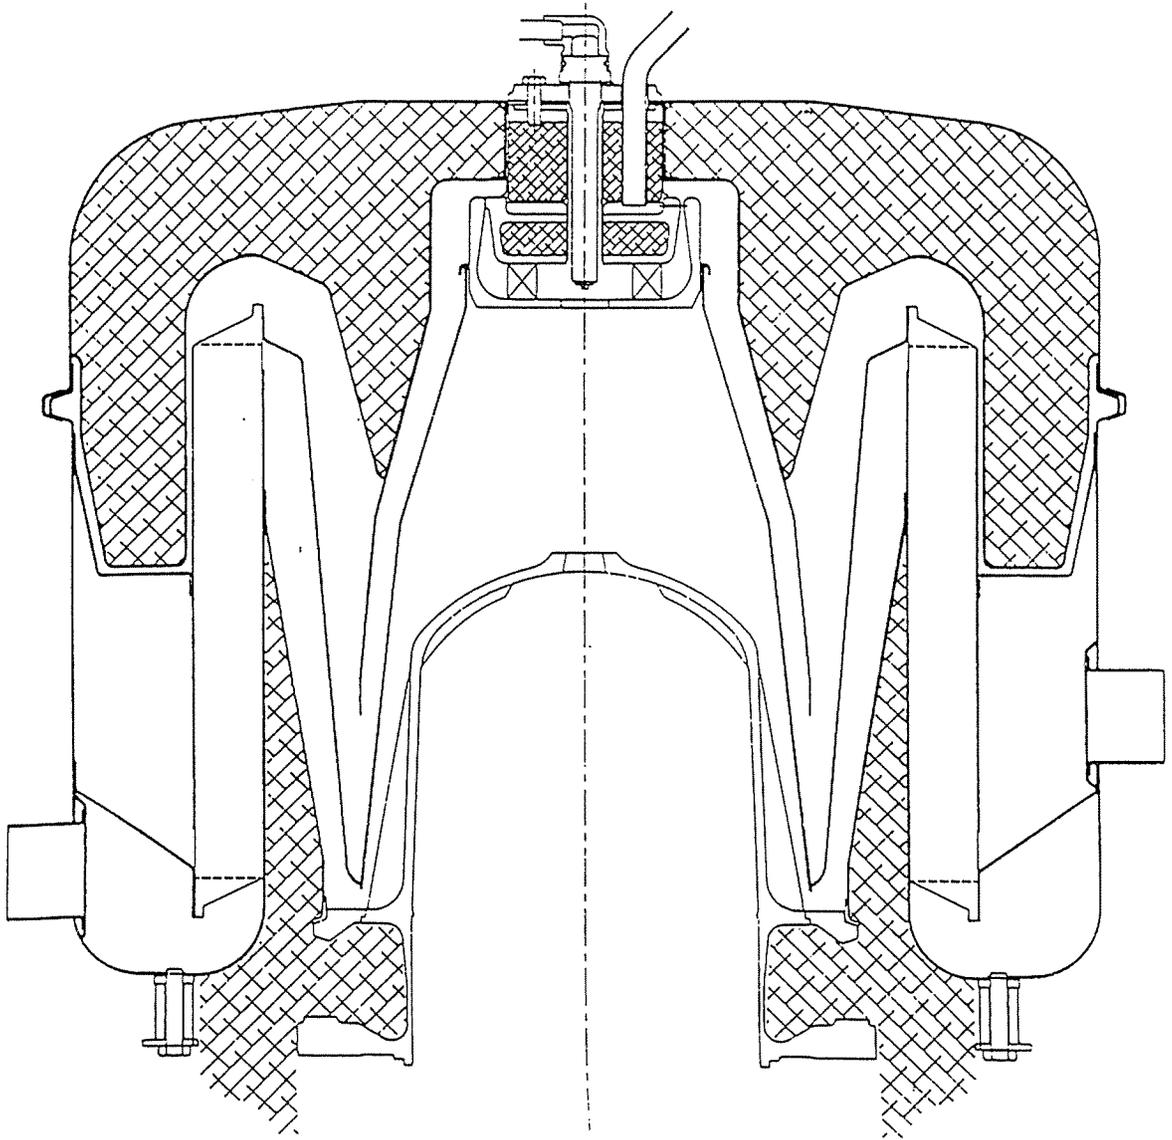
Mechanical Technology, Inc., external heat system for monolithic head.
